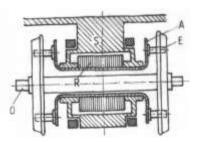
Engine thrust not suspended. longitudinal section; O - axle; R - rotor; S - stator; C - casing
